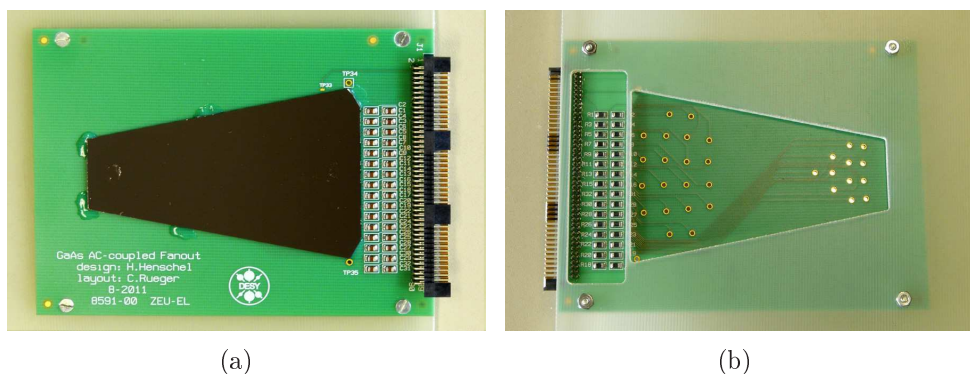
(a) The sensor glued on the fan-out bottom side. (b) Fan-out screwed to the PCB carriage with bonded sensor pads, top side.
